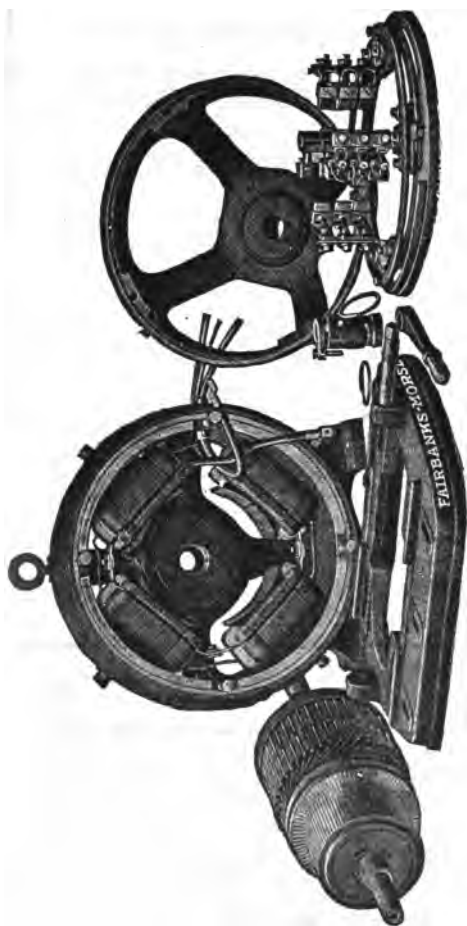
,828.—Fairbanks standard type TR machine disassembled.
